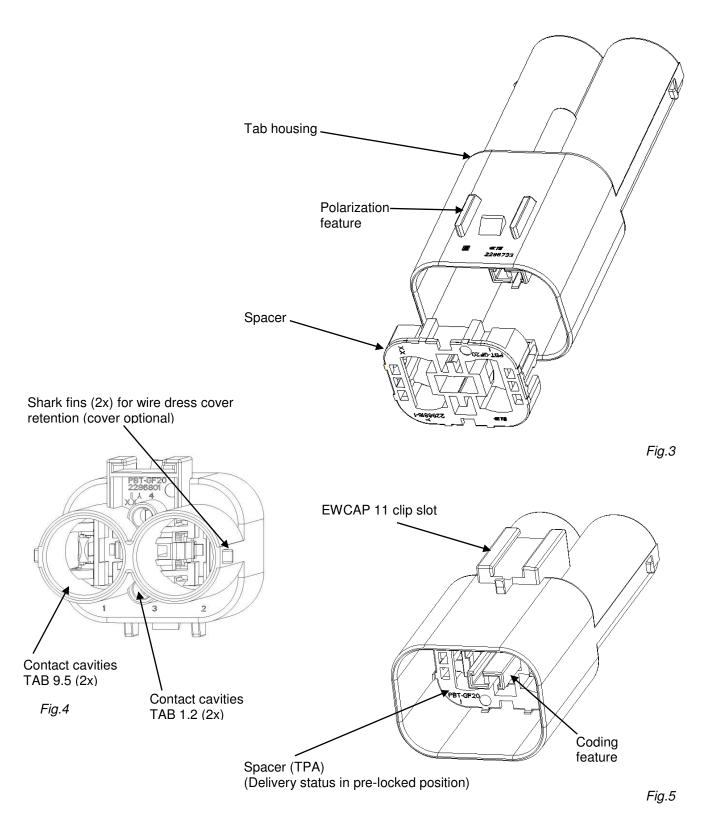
; 4; 5 TAB HOUSING 4POS ASSEMBLY (PN 2286733)
